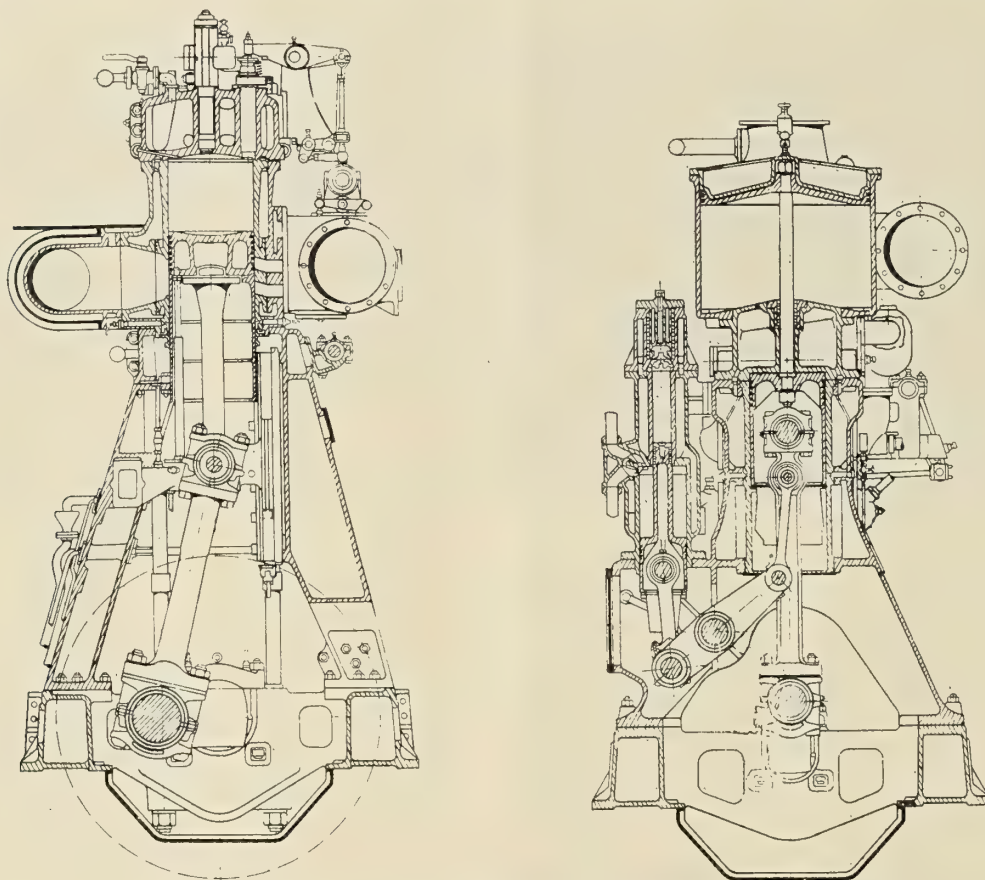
SECTIONS OF ENGINE THROUGH WORKING CYLINDER AND AIR COMPRESSOR
